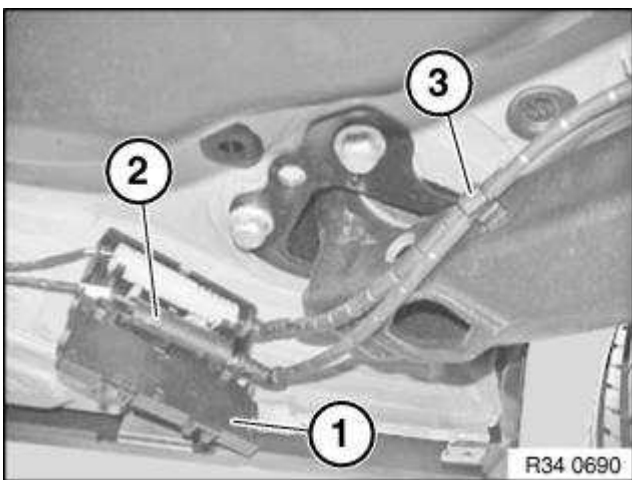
Disconnect Plug Connection (2) And Disengage Cable From Holders (3)
